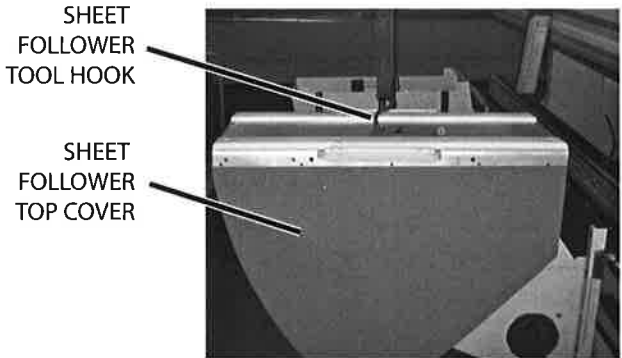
Using the SF Hook Tool to Remove the Top Cover
